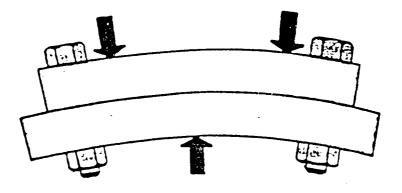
Transverse Bolt Loading Through Assemblage Bending (13).
